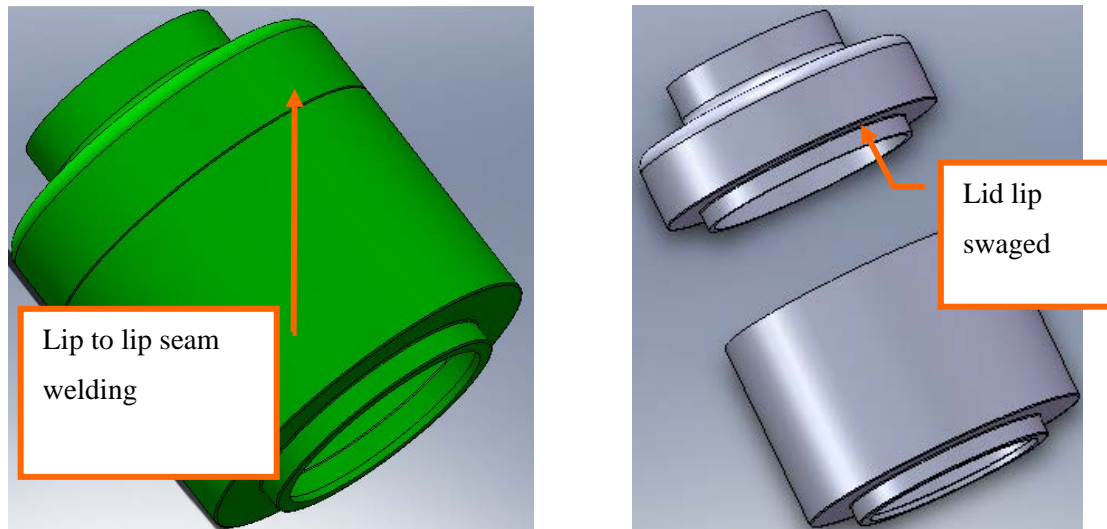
Swaging the lip would makings fitting and welding easier
